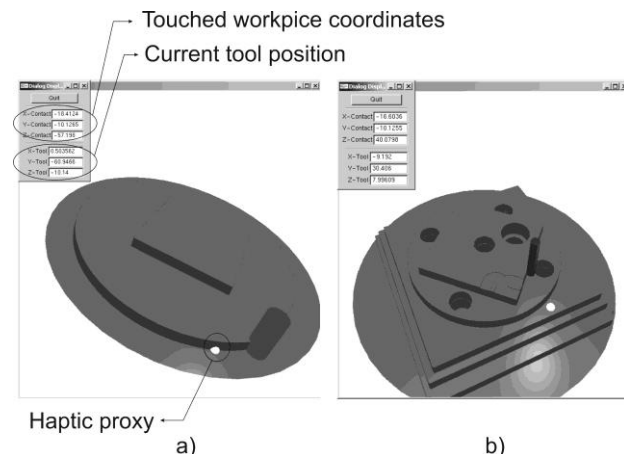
NC machining program verification display a) cutting process, b) final machined workpiece
